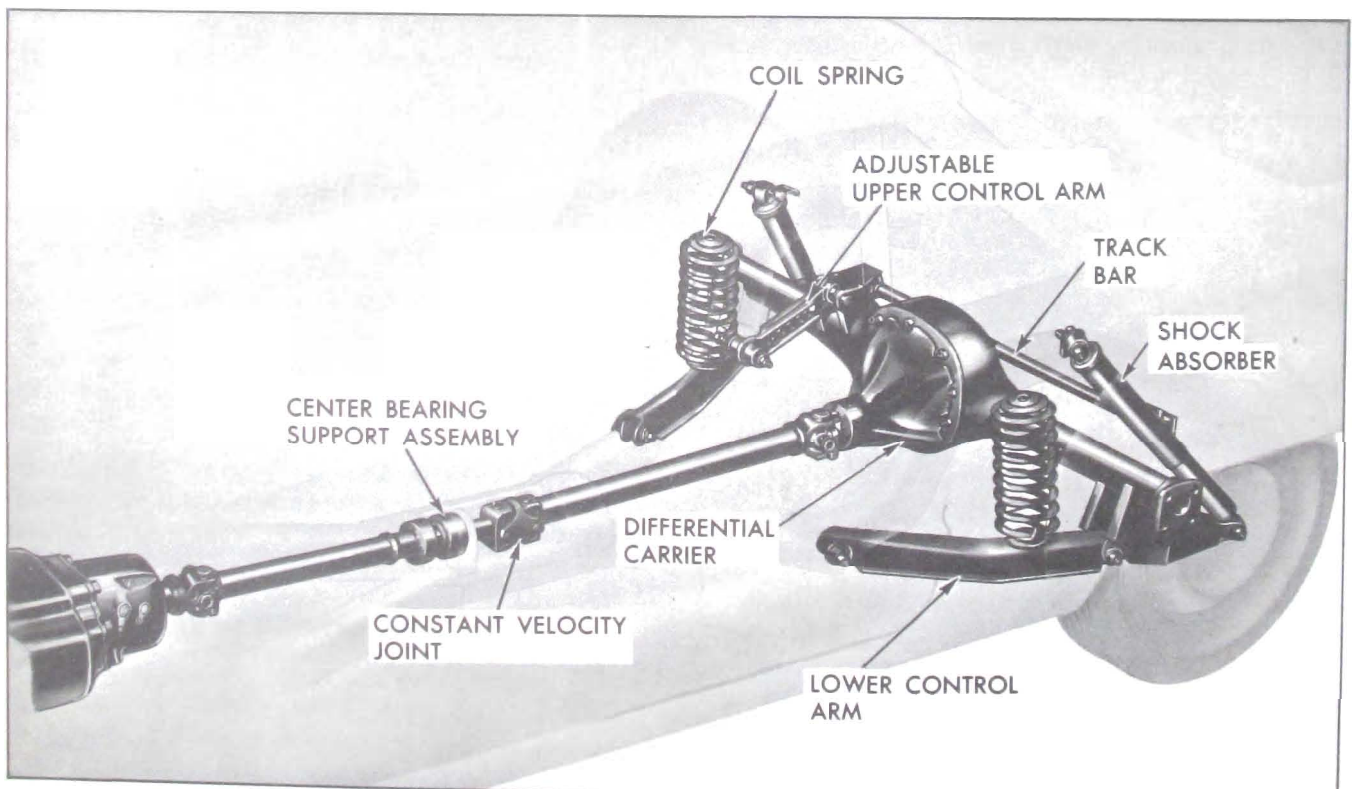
Propeller Shaft and Rear Axle Assemblies
